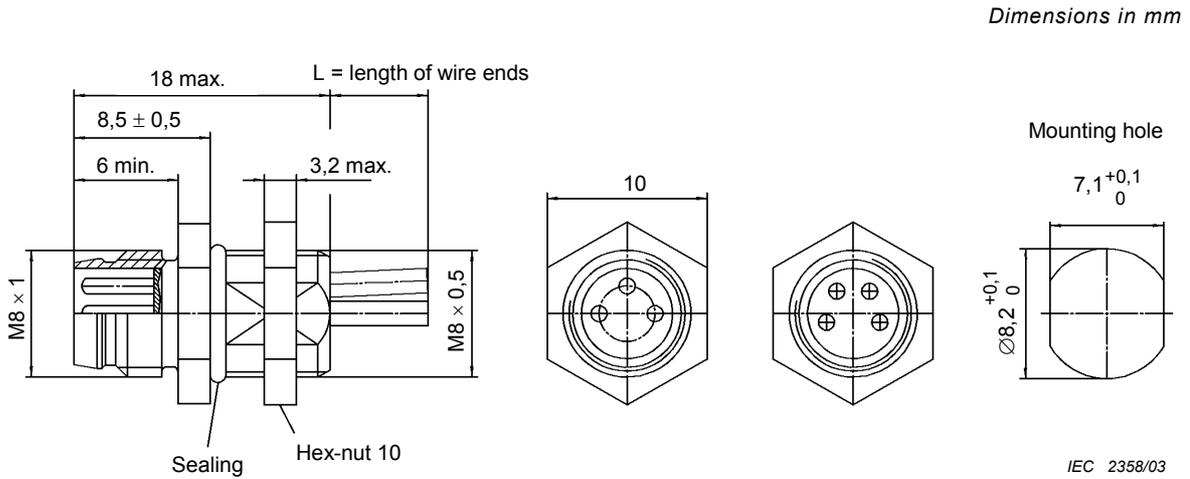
Fixed connector with wire ends, single hole rear mounting, male contacts
